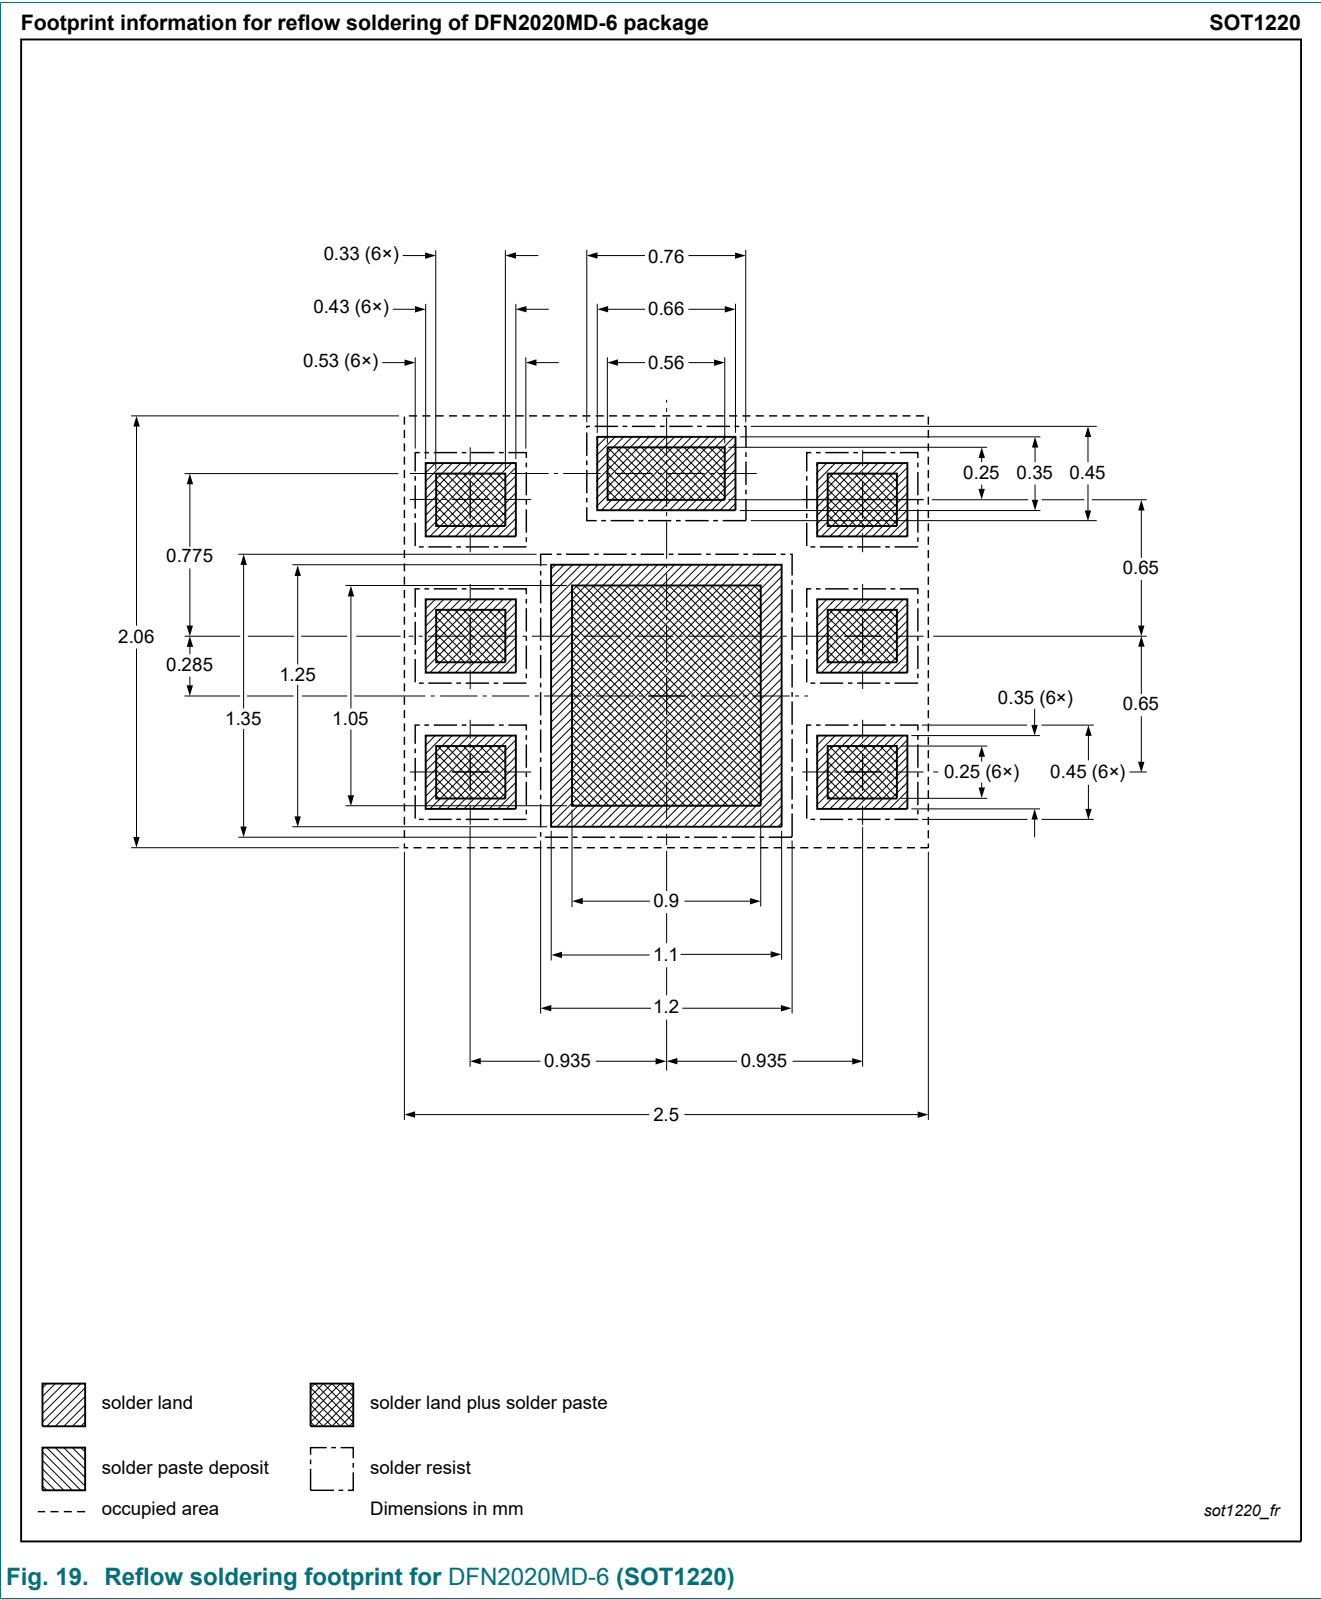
Reflow soldering footprint for DFN2020MD-6 (SOT1220)
